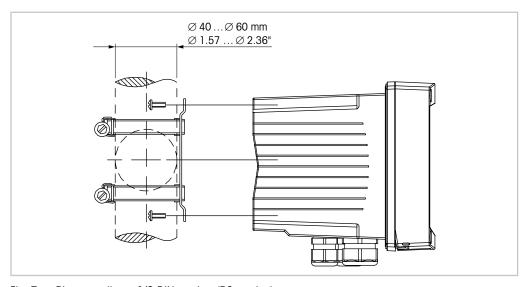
Pipe mounting – 1/2 DIN version (PC version)
